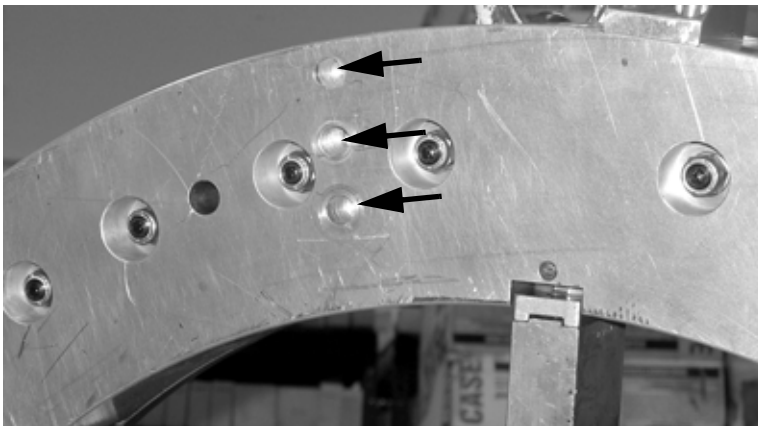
There are two dowel pin holes and one threaded hole at the trip location.
